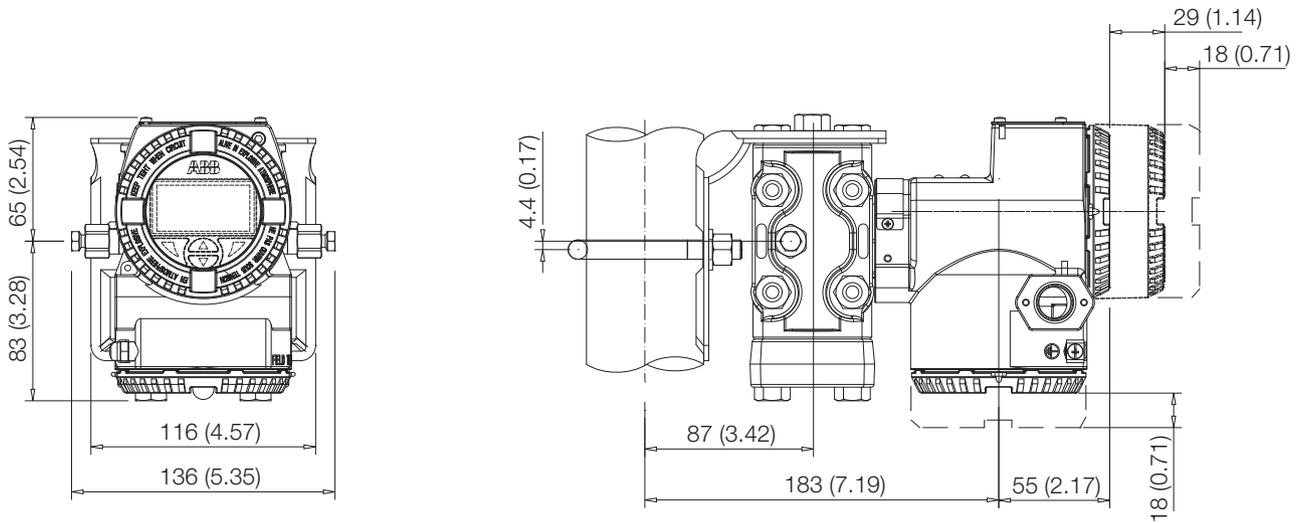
Differential Pressure Style transmitter with barrel housing and Kynar inserts installed on a horizontal pipe with optional bracket (B2)
